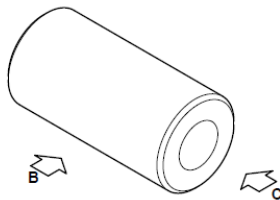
Bearing Staking and Removal Tools Modification (Sheet 1 of 3)
